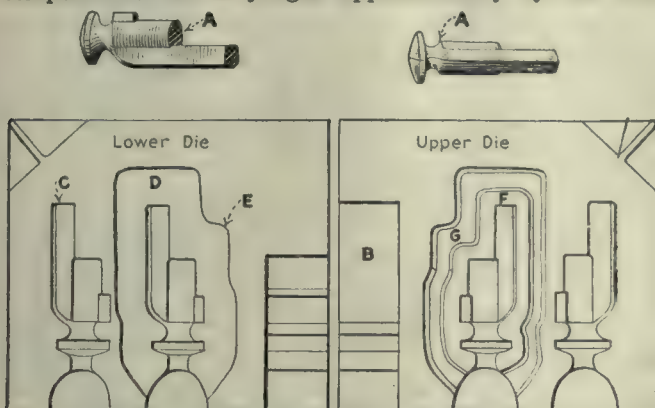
UPPER AND LOWER FORMING AND FINISHING DIES
